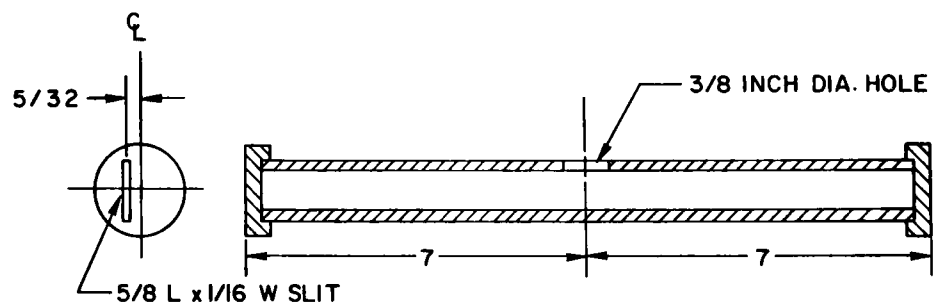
Schematic of Alternative Rotor Design. Neg. No. ANL-306-78-562
